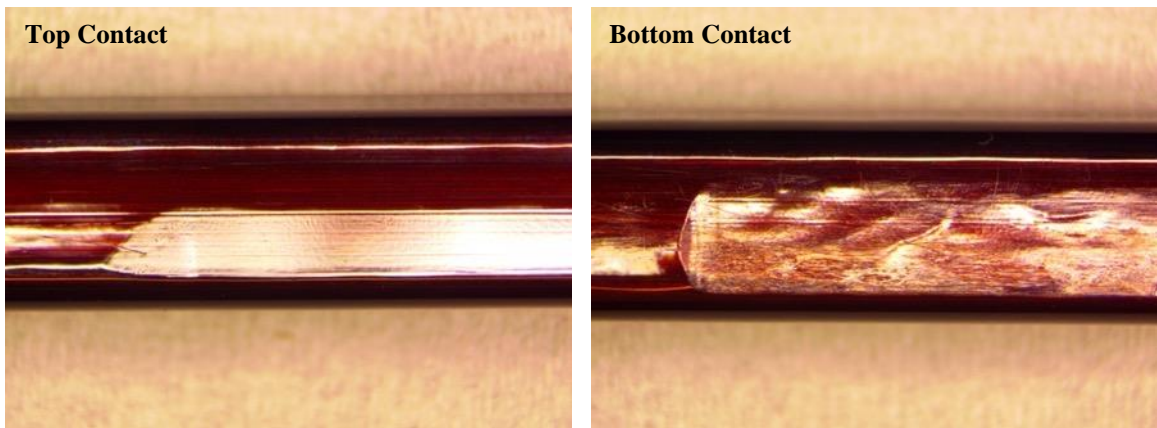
Top and bottom surface contact for aluminum wire tested at 37 lbs normal load with 3 mm radius support roller.
